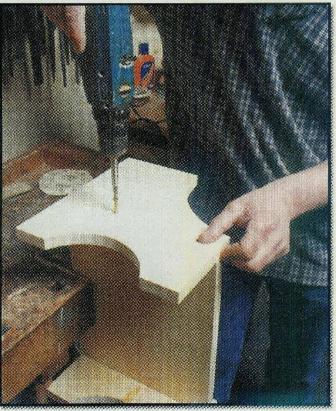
To begin assembly, hold the bottom step in a vise as you glue and screw on the sides.
